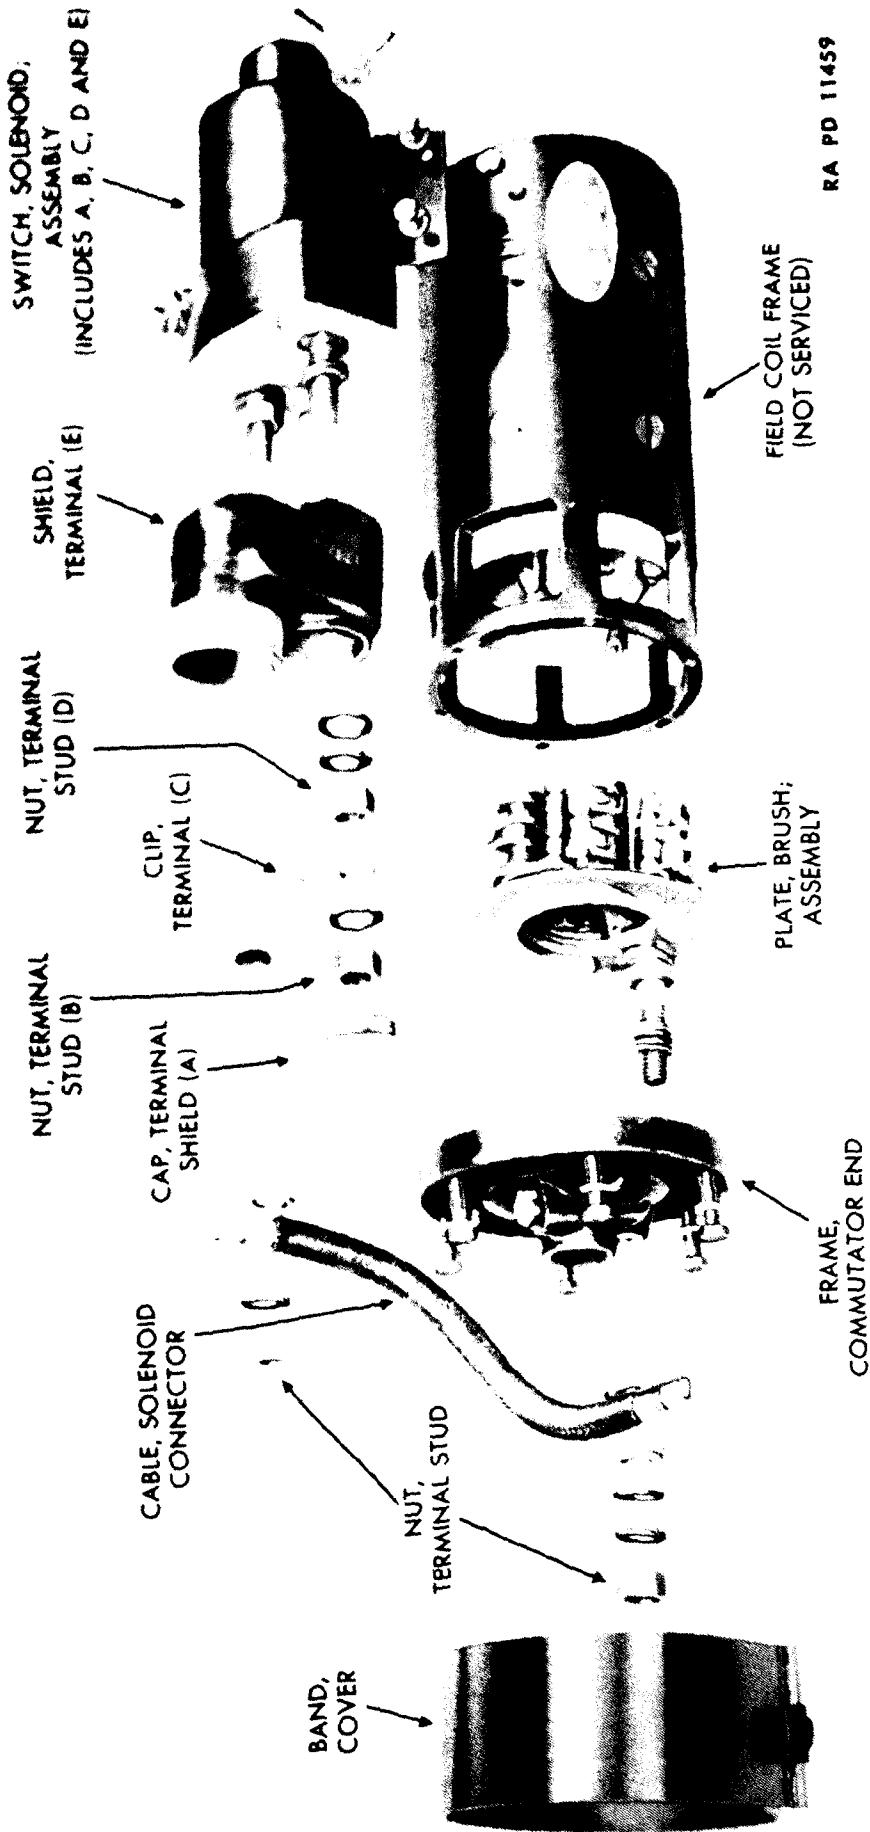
Component and Related Parts of Commutator End Frame, Field Frame and Solenoid
